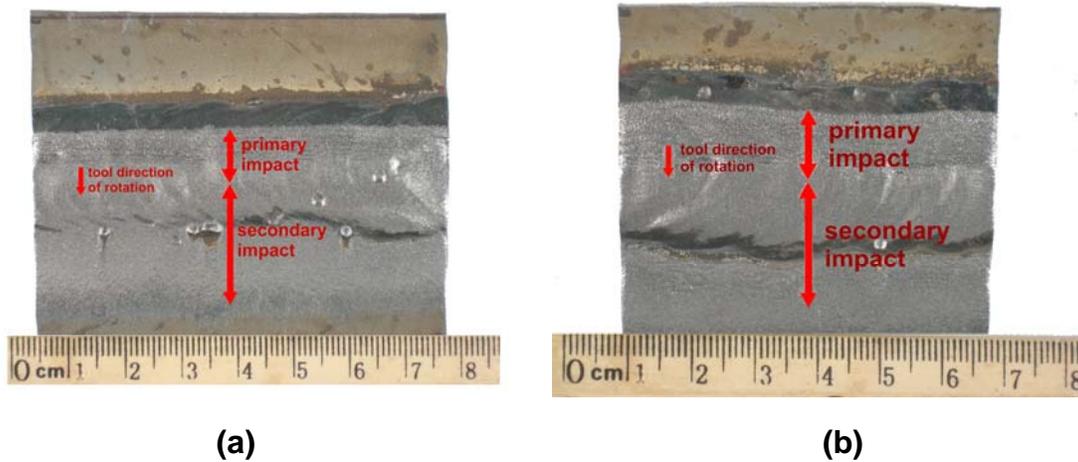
Bristle blast surface of specimen used in material removal study for (a) ABS-A welded joint, and (b) AH-36 welded joint
